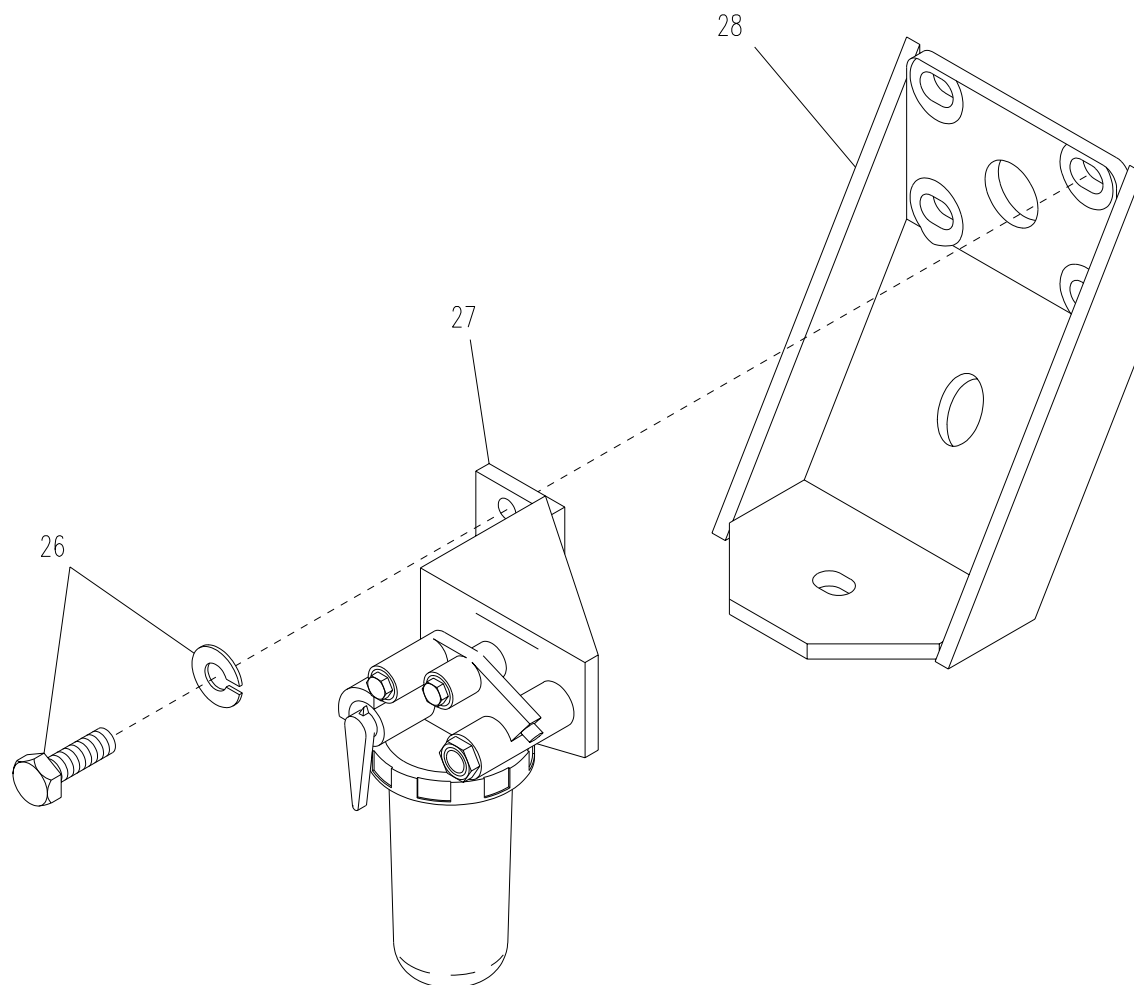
Diesel Engine (Sheet 9 of 11)
